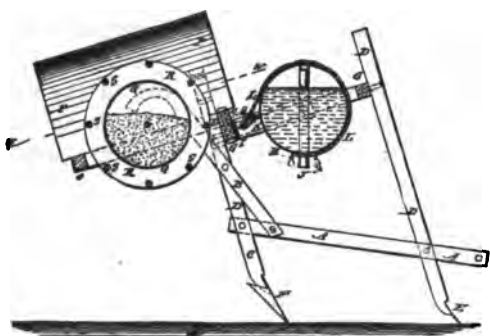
THE TAYLOR DUSTING AND SPRINKLING MACHINE.
